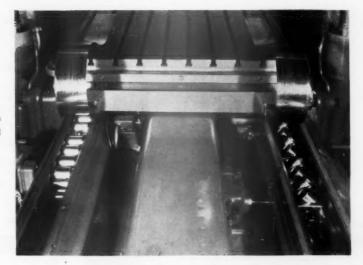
Roller type vee and flat way on large heavily loaded jig boring and milling machine.
